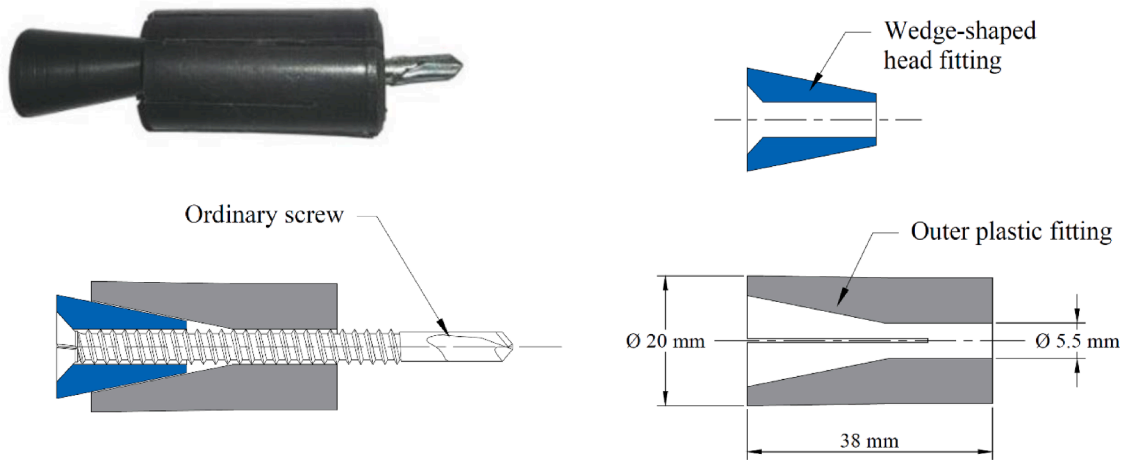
Type 2 connector including cross-sectional component details and assembly detail.
